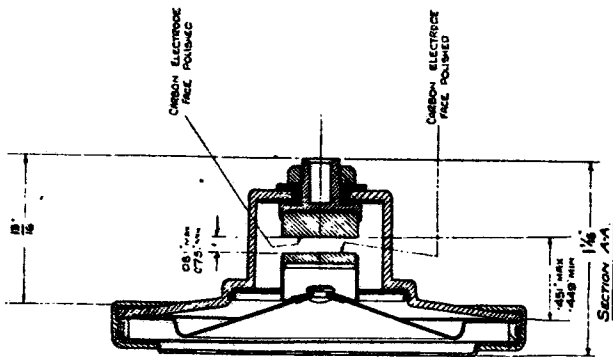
SIEMENS TYPE TRANSMITTER.
